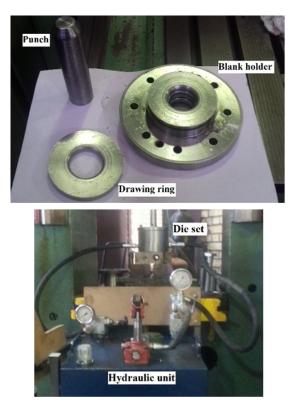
Experimental equipment for hydromechanical deep drawing of a bilayer conical cup.
